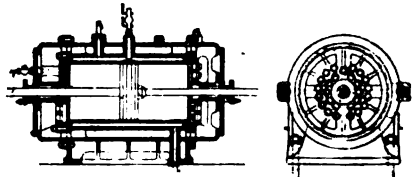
SECTION OF LOW PRESSURE CYLINDER OF COMPRESSOR SHOWN IN FIG. 2.
